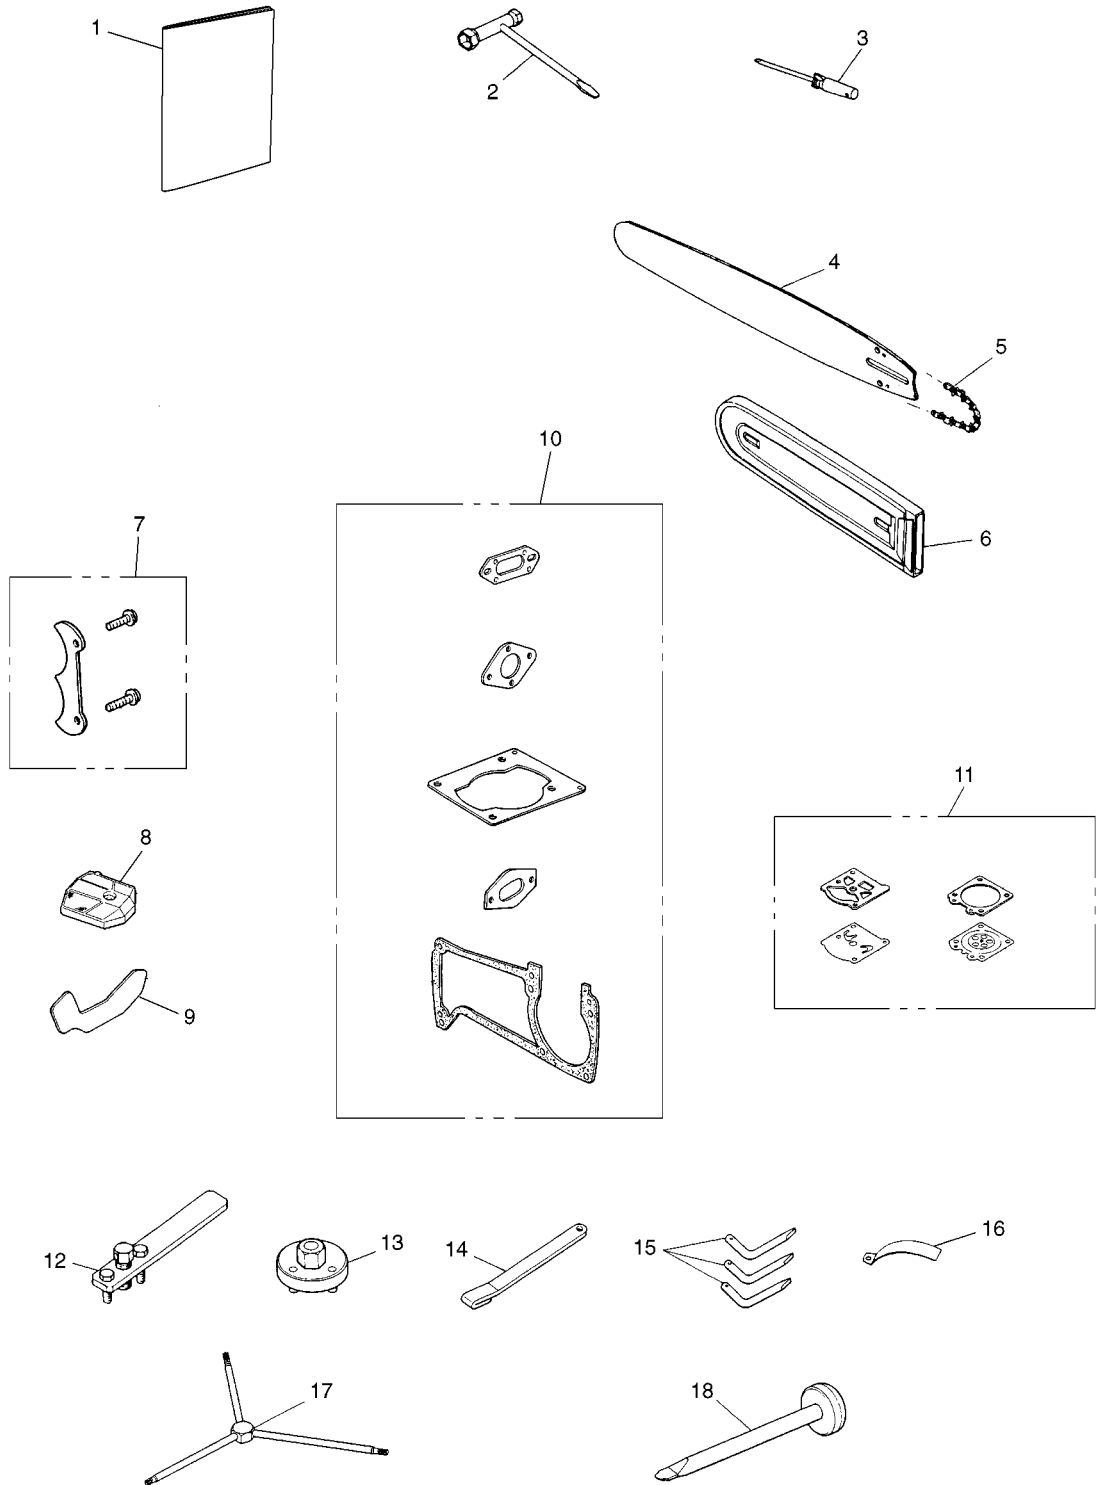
GUIDE BAR, SAW CHAIN, TOOLS
